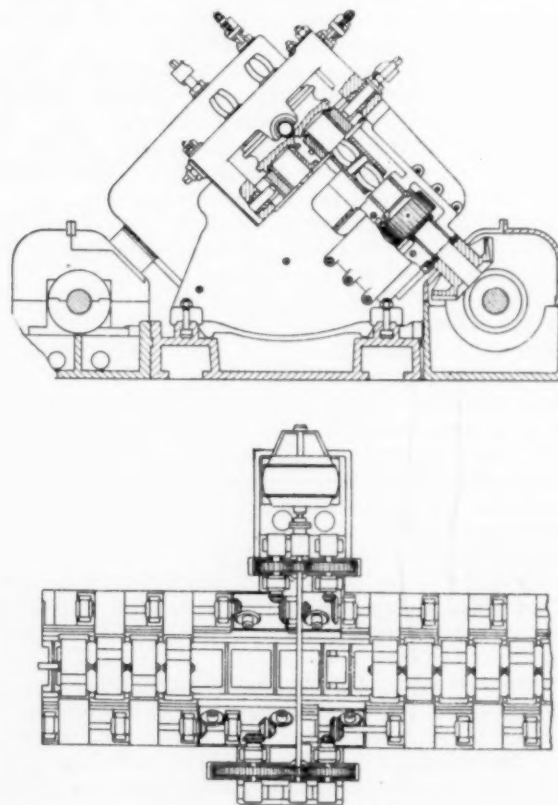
AN IMPROVED TUBE ROLLING MILL
